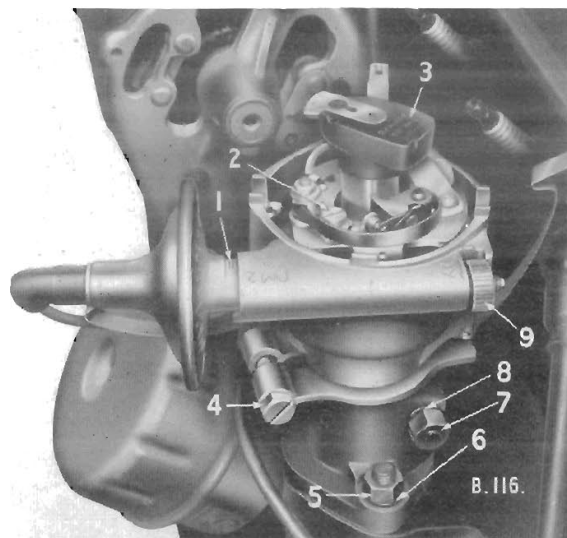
Distributor rotor arm position at T.D.C. Firing on No. 1 cylinder (Herald 1200, 12/50)
